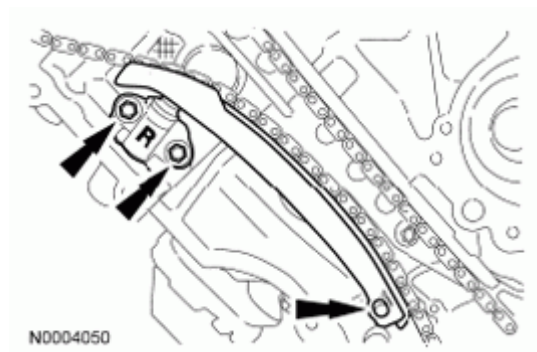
Locating Timing Chain Tensioner And Mounting Bolts
